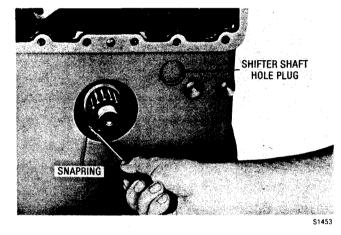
Removing output shaft front bearing snapring (-1 models with one-piece output shaft)
